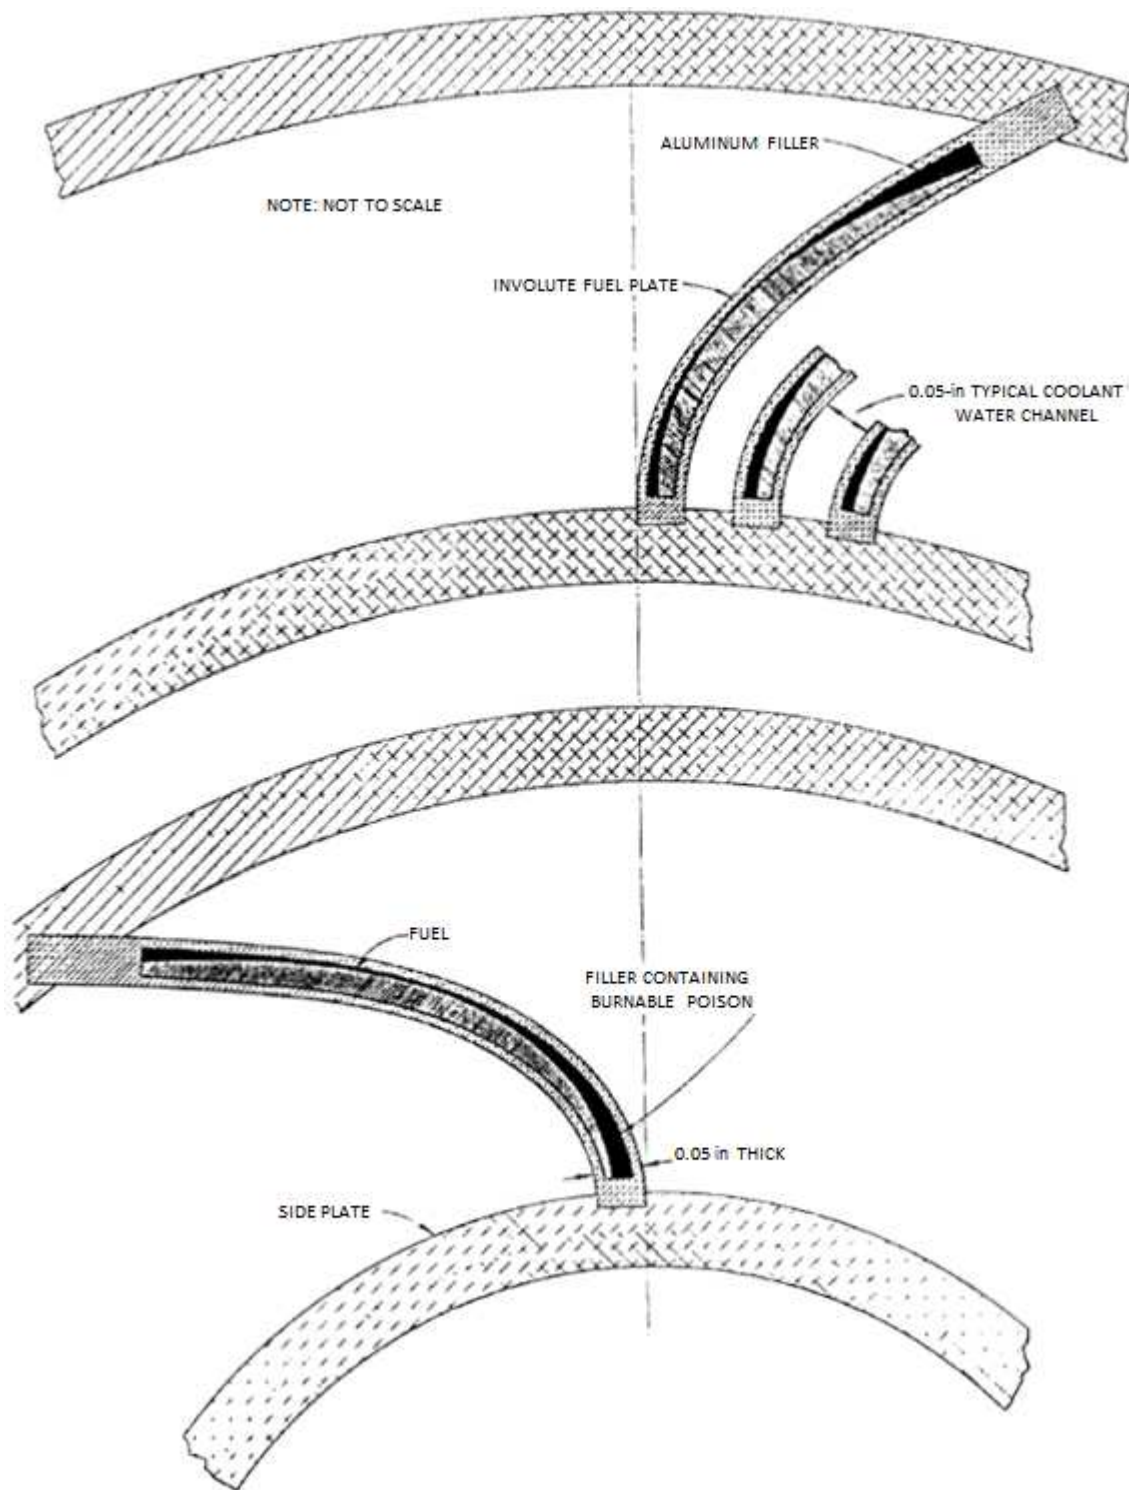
Schematic cross section of the HFIR fuel assembly [1].
